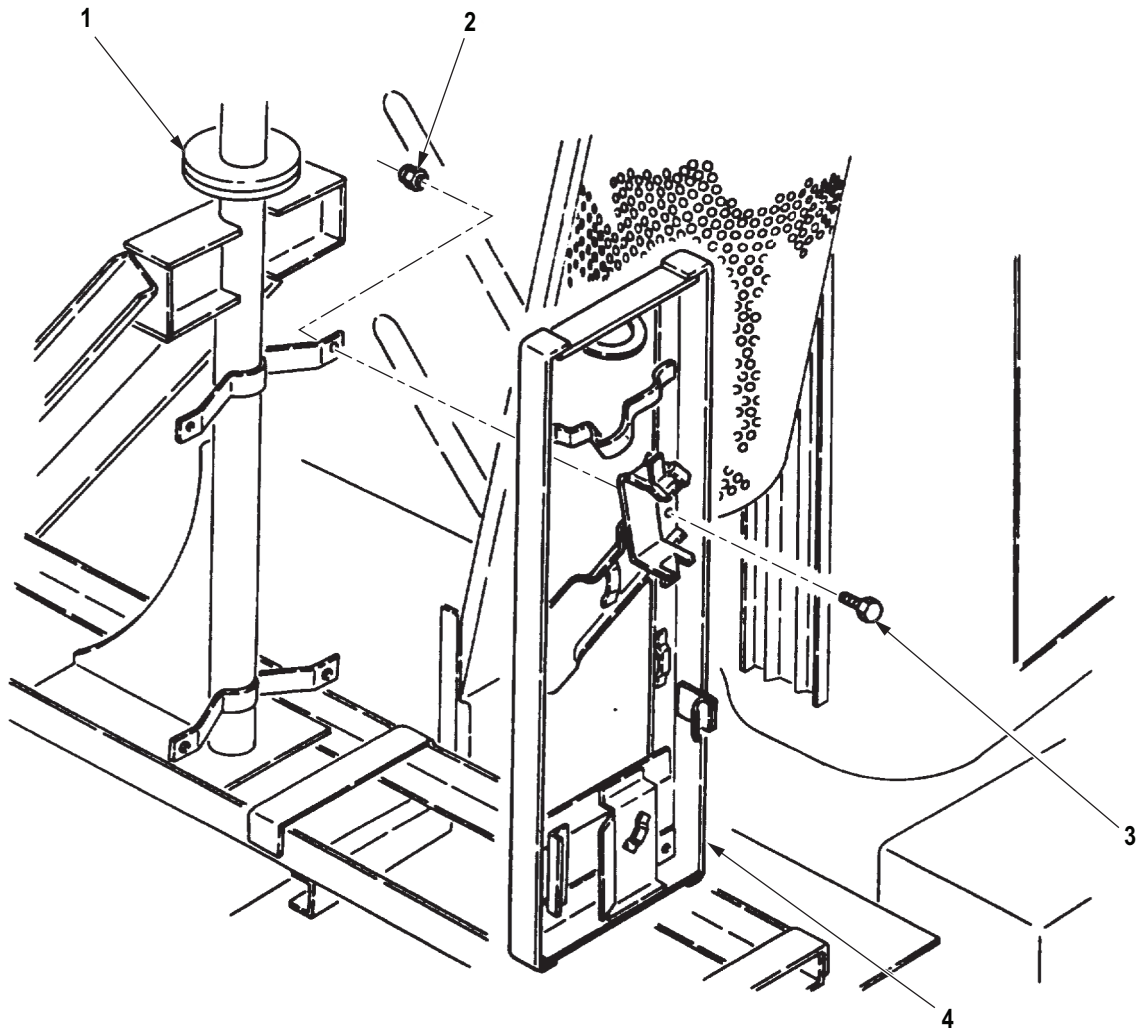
Pioneer Tool Kit Mounting Bracket Installation.
